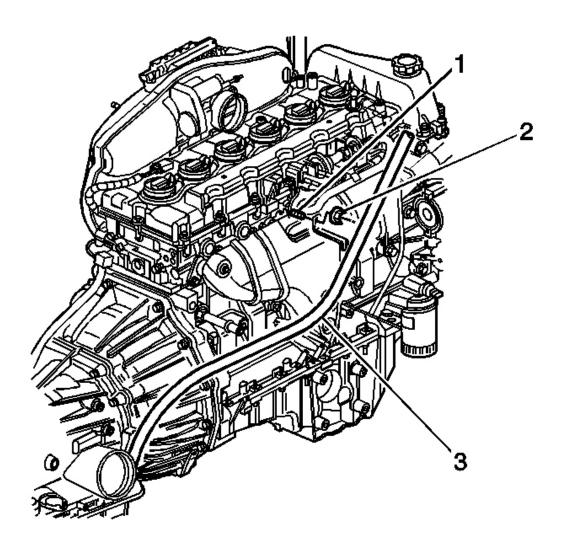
View Of Filler Tube, Nut & Stud Courtesy of GENERAL MOTORS CORP.
